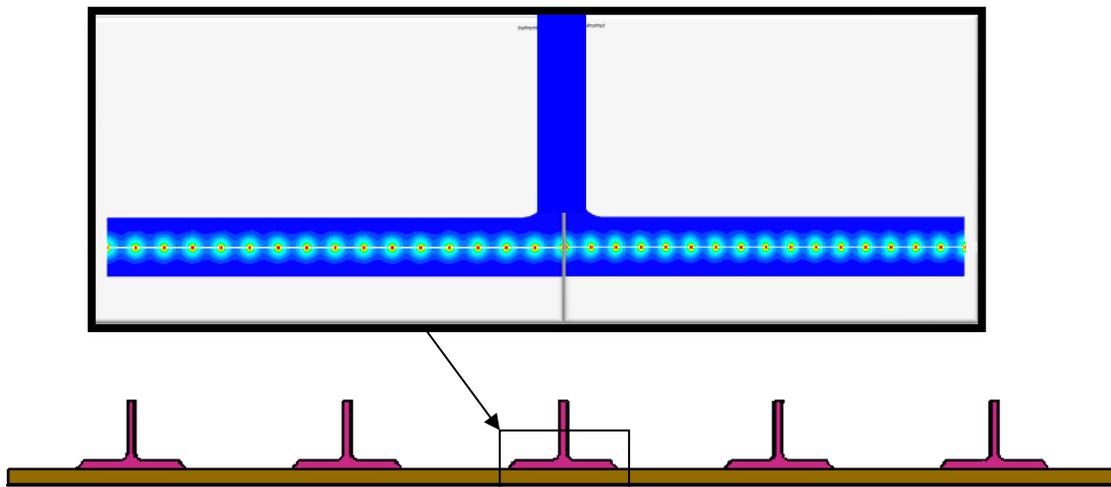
Depiction of the weld joint for the demonstration panel that was fabricated - note the location of the smart susceptors in the weld joint.
